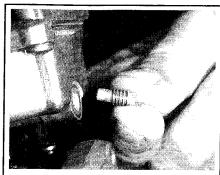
and, if equipped, the orifice plug from the float bowl
